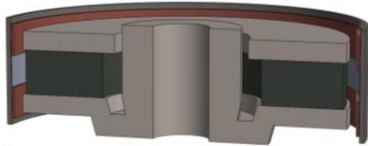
Loudspeaker with Anti-Rattle magnetic assembly side section.
